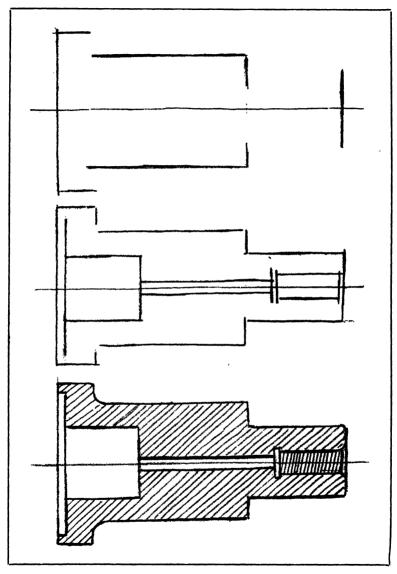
Example Showing How a Sketch is Proportioned and Built Up by First Drawing the Foundation Lines
